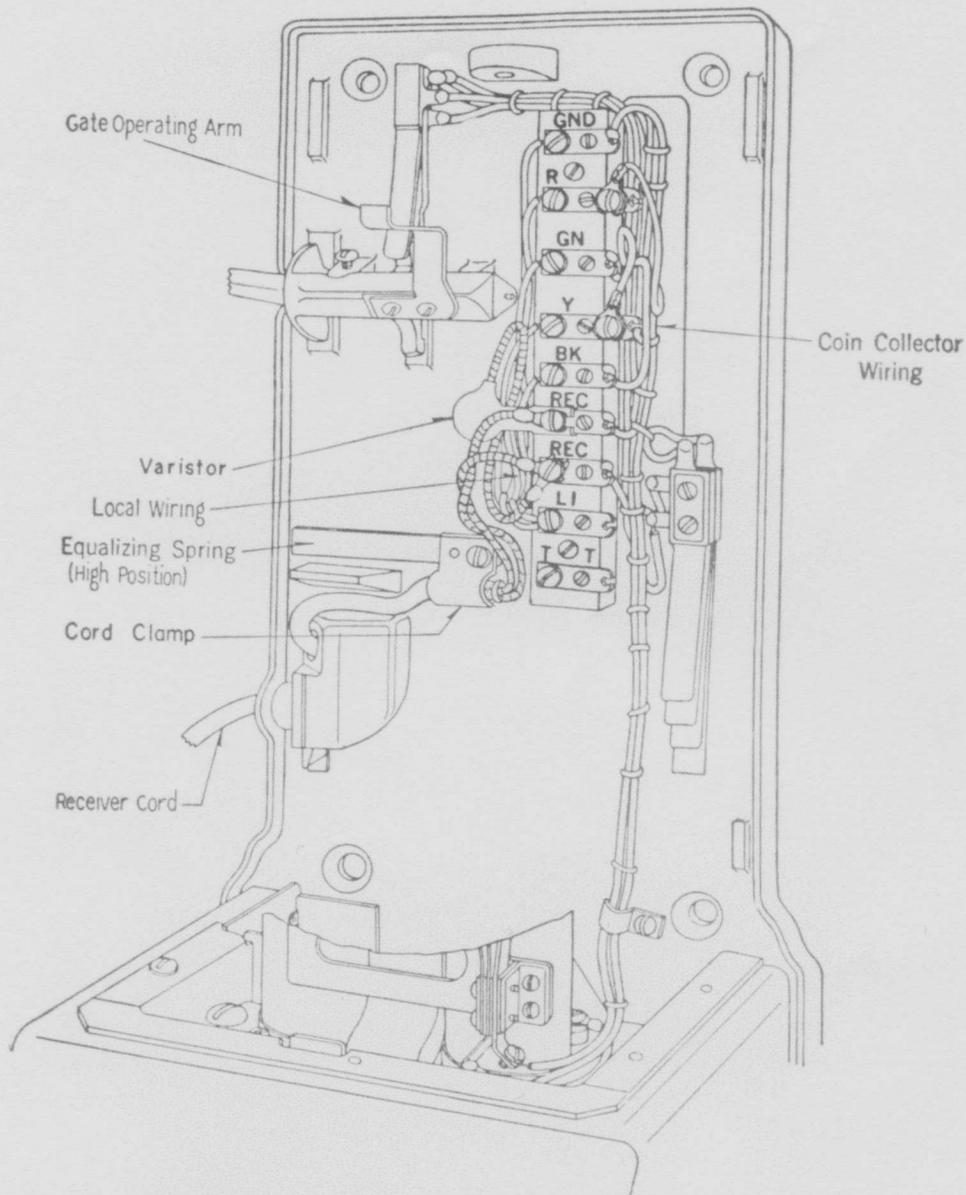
155-type Coin Collector with Equalizing Spring in High Position—Lower Housing and Backplate Assembly
